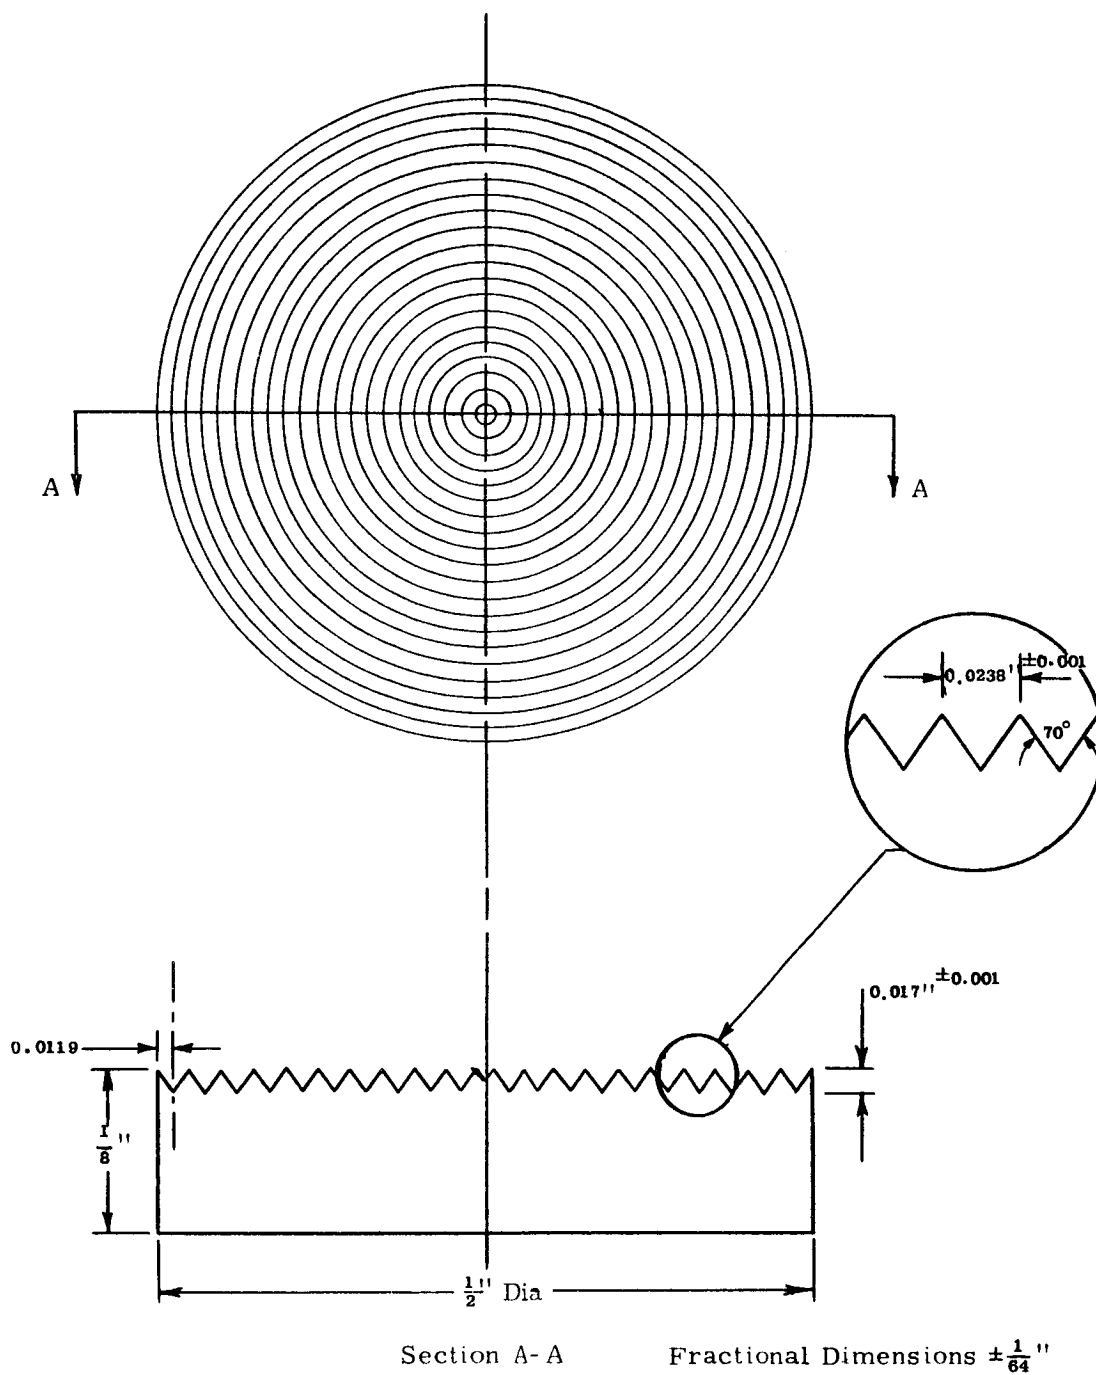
Grooved Copper Slug for Radiation Calorimeter Assembly
